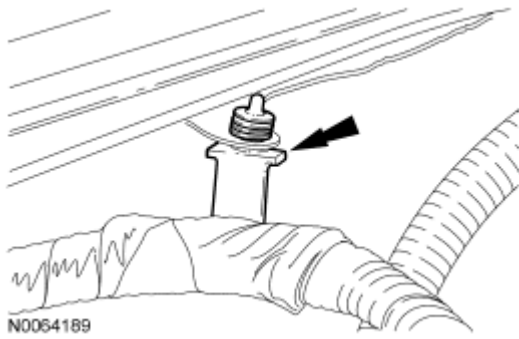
Detaching Pin-Type Wire Harness Retainer From Cowl
